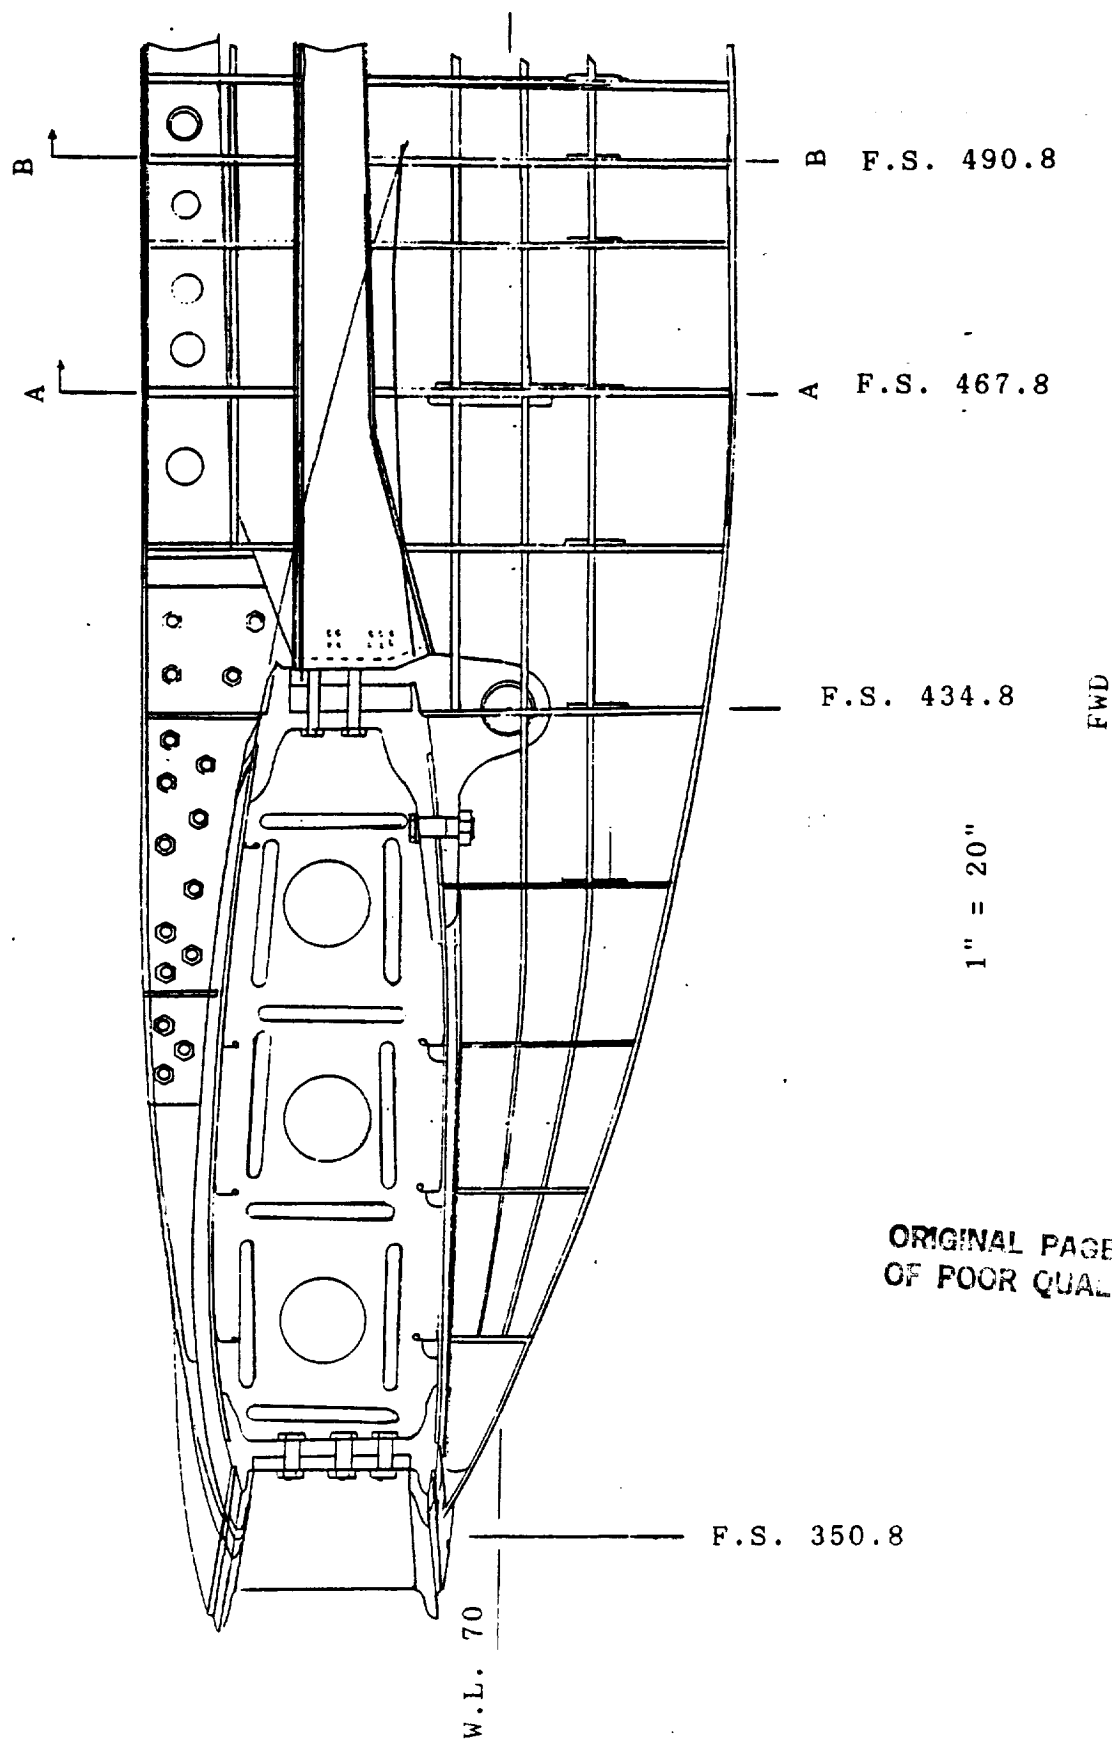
Boom and main gear attachment for the Good airplane. (Side view)
